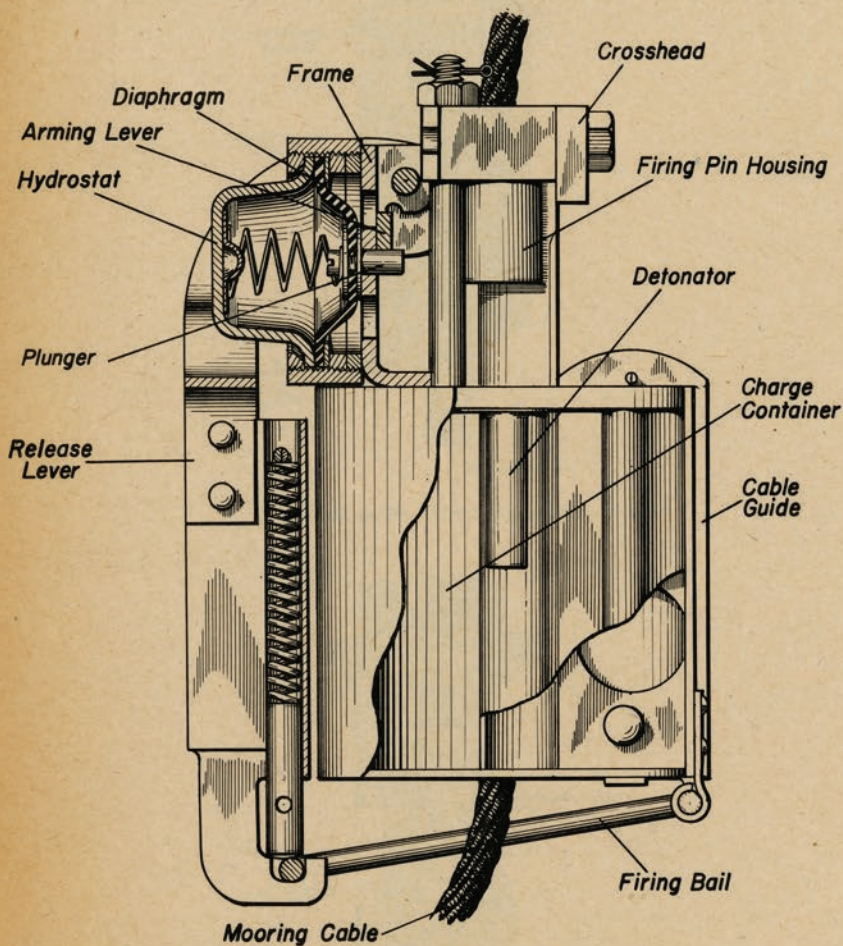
Mark MZ-26 Explosive Cutter, Sectional View
